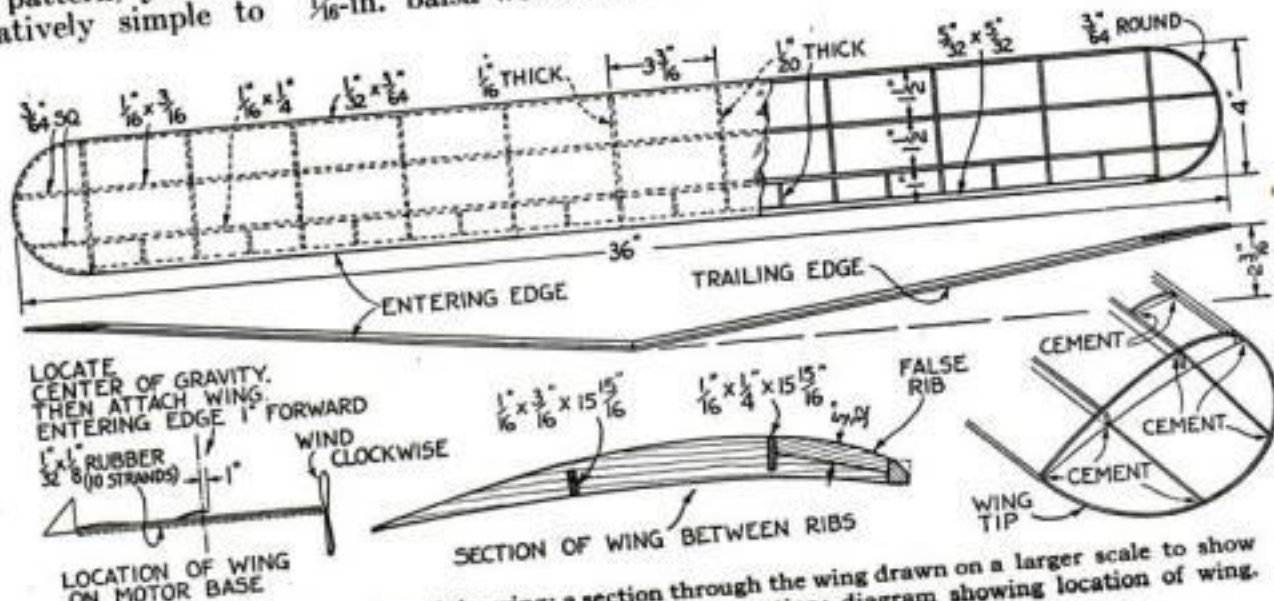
Top and front view of the wing; a section through the wing drawn on a larger scale to show shape of ribs and false ribs; sketch of the tip construction; diagram showing location of wing.
